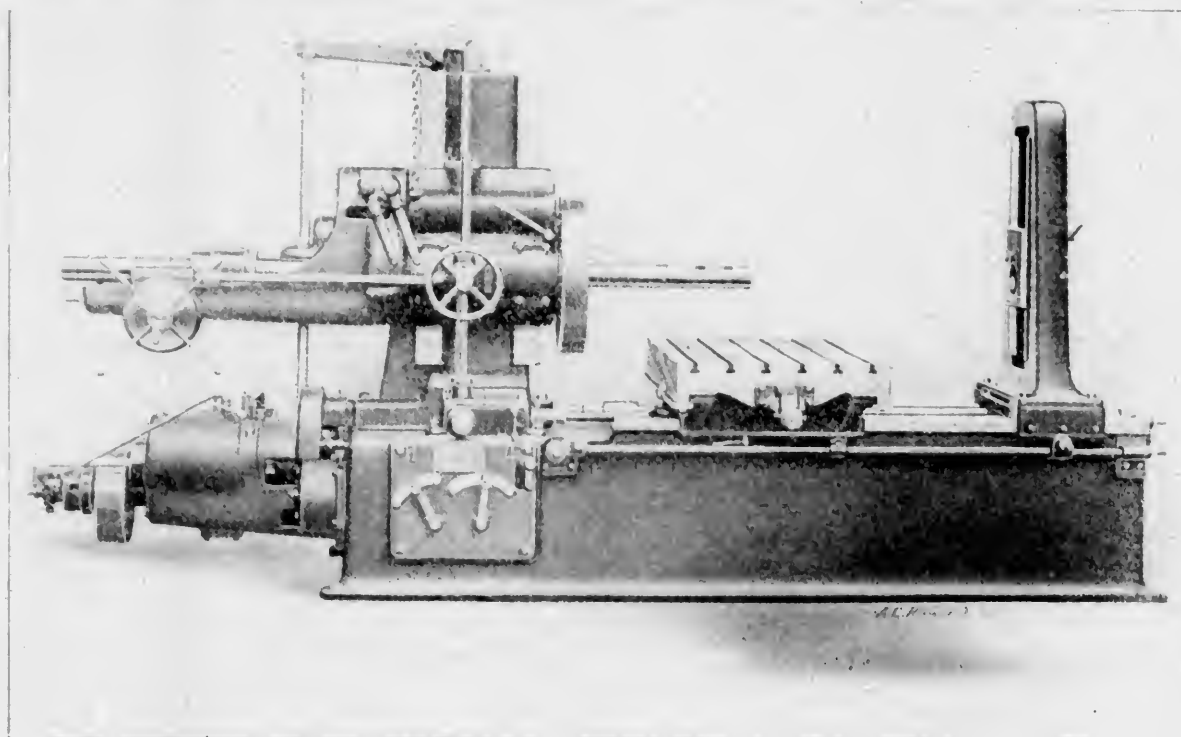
HORIZONTAL BORING, DRILLING AND MILLING MACHINE.
